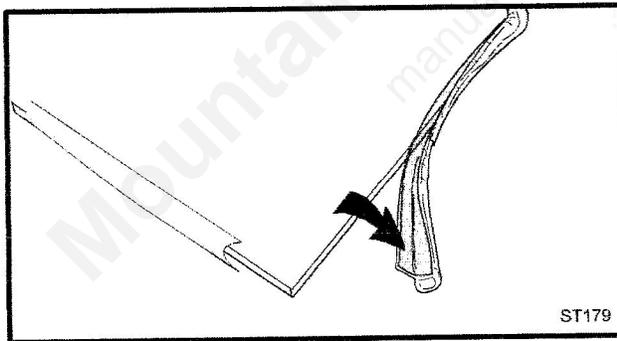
Wrap the gasket material around the outside edge of the glass.
